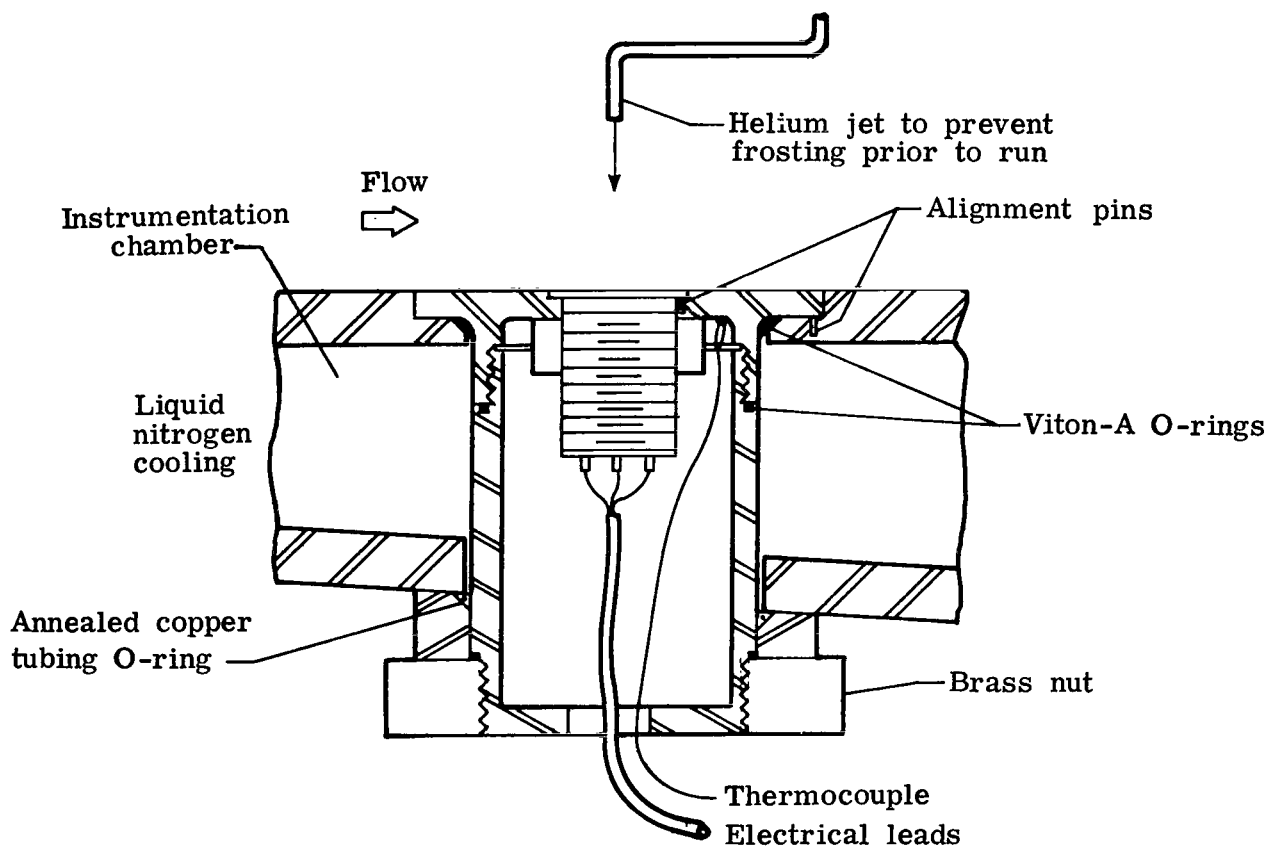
Skin-friction balance mounting arrangement for model 2.
